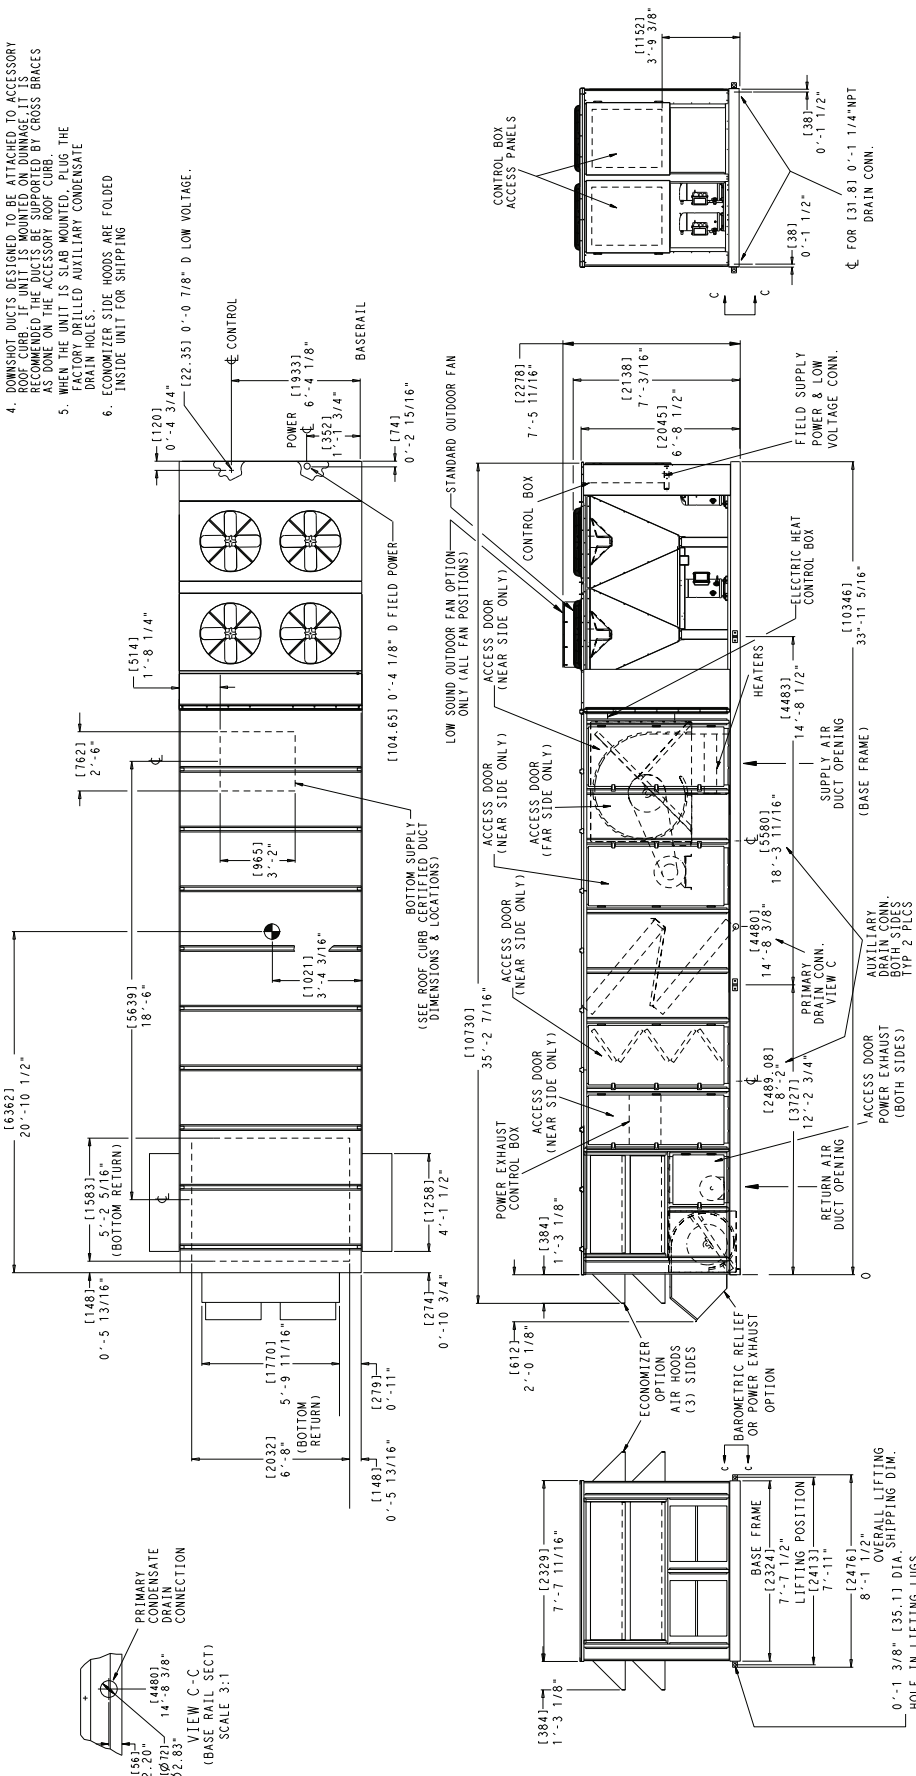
Base Unit Dimensional Drawing — 50P2, P3070 (Standard Chassis Unit Shown)
